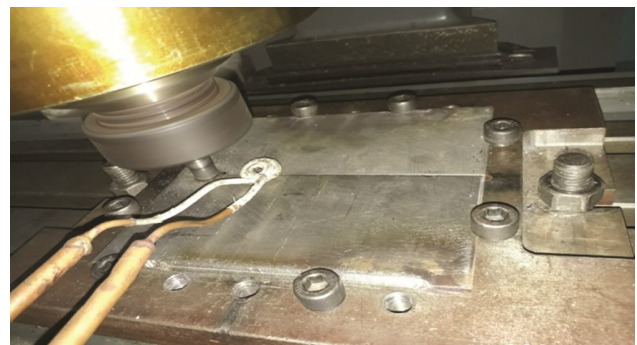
Induction assisted friction stir welding on AISI 410 SS
